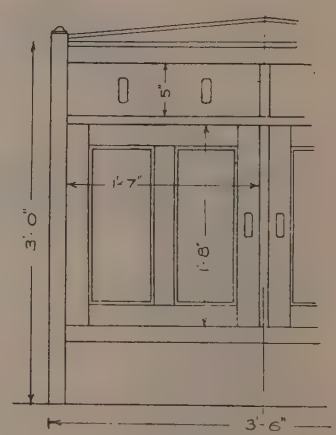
3 FT. 6 IN. SIDEBOARD.
